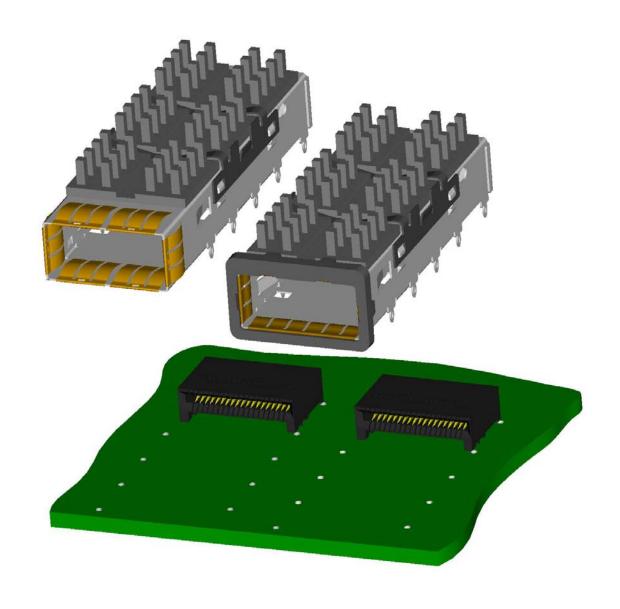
Thru Bezel Cage and Optional Heat Sink Designs (exploded view)
